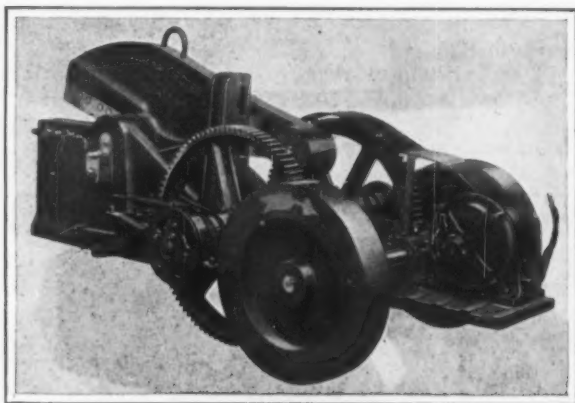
Alligator Shears with Die Equipment for Cutting Material on a Bevel. The upper jaw of the machine is fitted with a die corresponding in shape to the upper half-circumference of the bar to be cut, while a die to fit the lower half of the bar is attached to the lower jaw. A clamp on the under jaw of the machine prevents any upkick of the bar during cutting.
